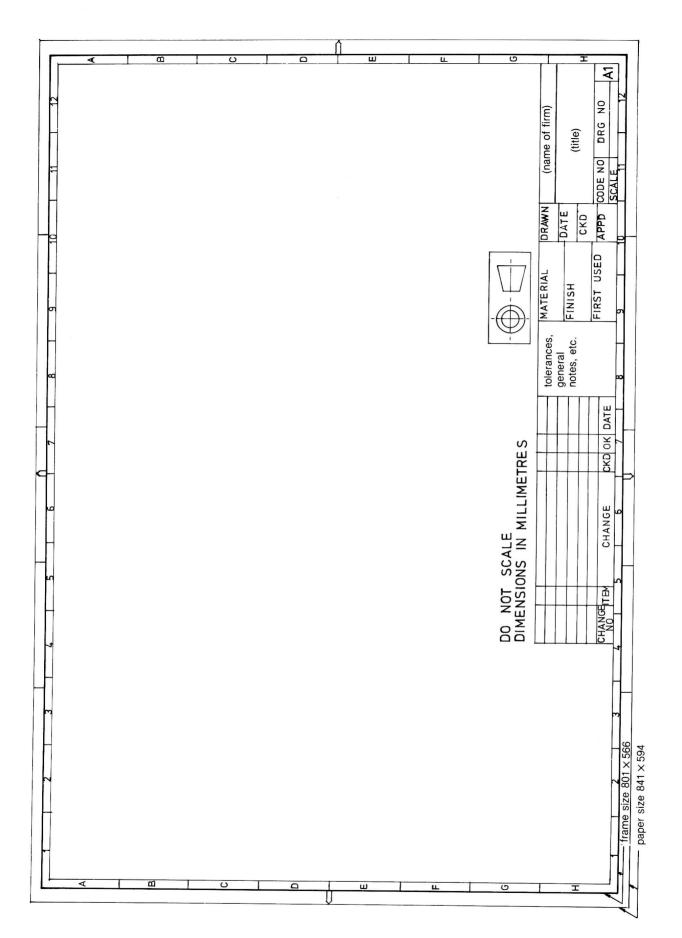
Typical layout of a drawing sheet (suitable for detail drawings)
